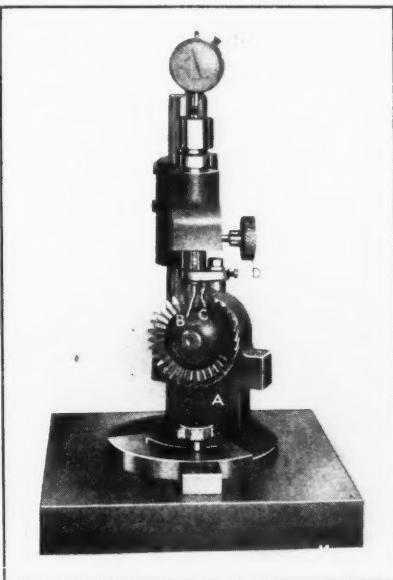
Instrument used for checking the Tooth Spacing of Spur or Helical Gears and Gear-shaper Cutters
